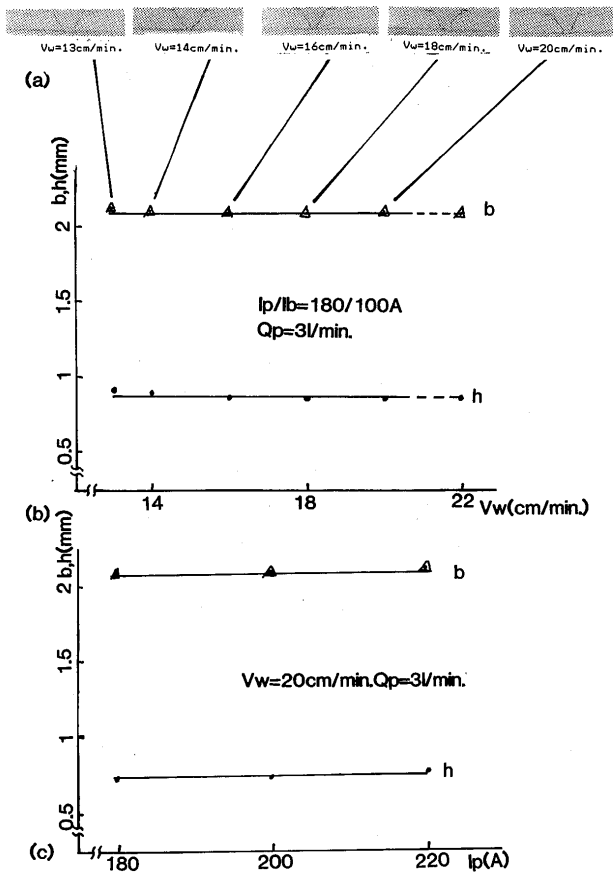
Typical weld cross-section (a) & width & height of back weld made of different V_w (b) or I_p/I_b (c)
